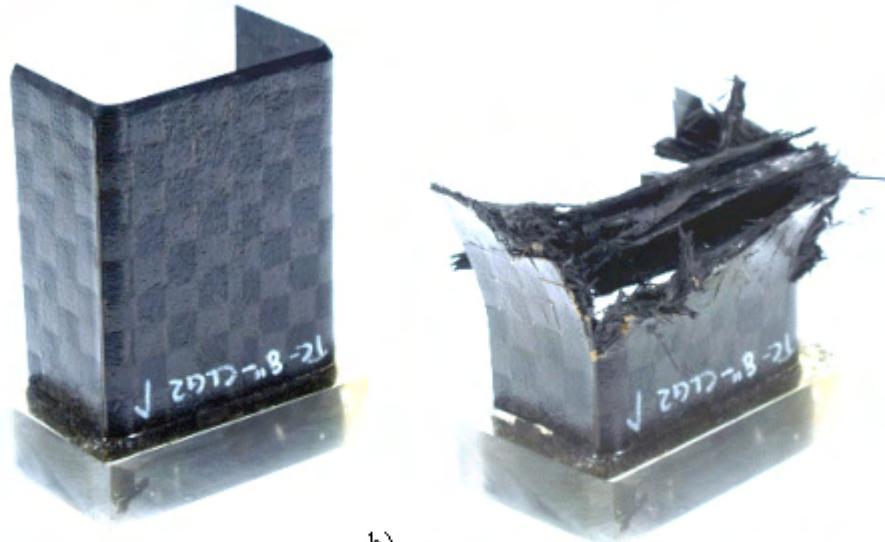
a, b. Large C-channel, specimen II, before and after crush testing.
